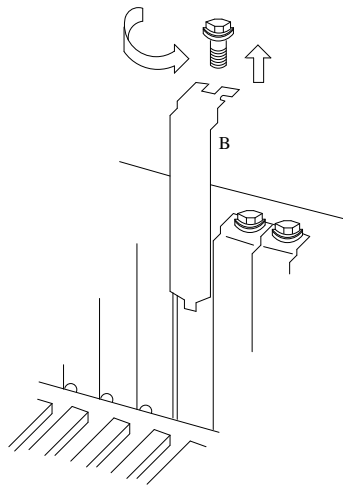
Removing a Circuit Card Mounting Bracket Screw
